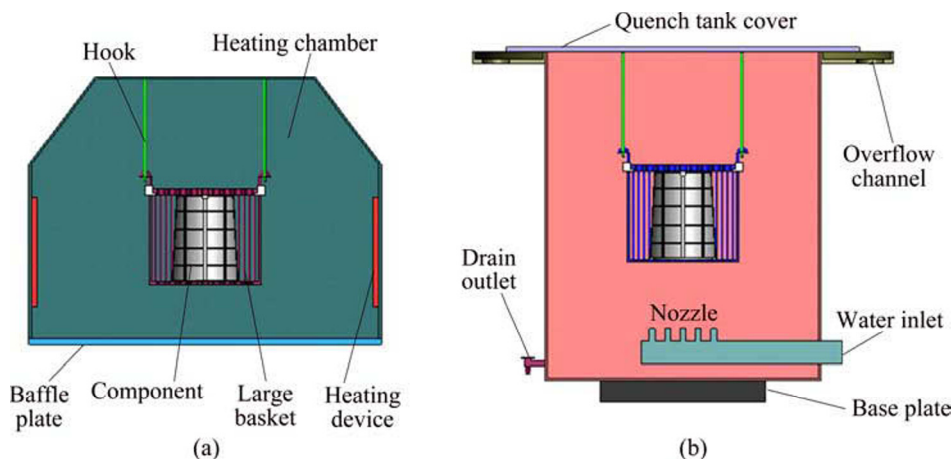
Heating furnace (a) and quench tank (b) of aluminum alloy large complicated component
